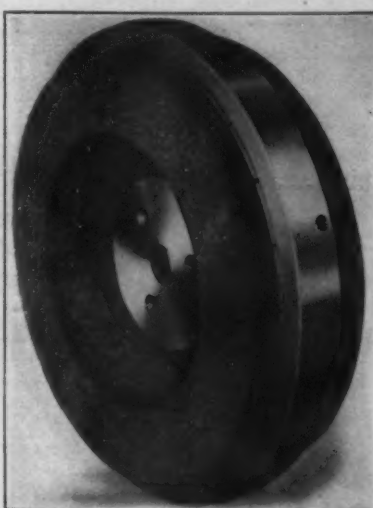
A New Type of Ring Wheel Chuck for Grinding Machinery Made by the Gardner Machine Company, Beloit, Wis.
